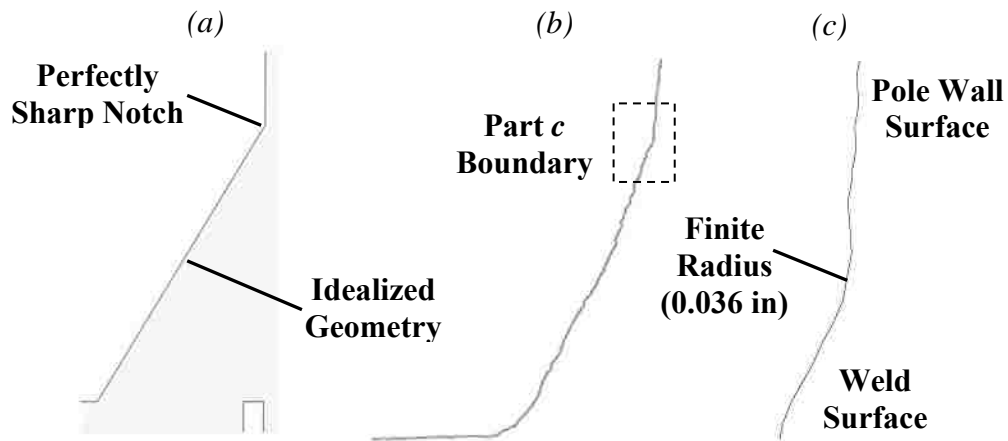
Differences in weld shape: *a*, FEA model; *b*, 3D-ICP section of weld profile; *c*, enlarged view of 3D-ICP.
